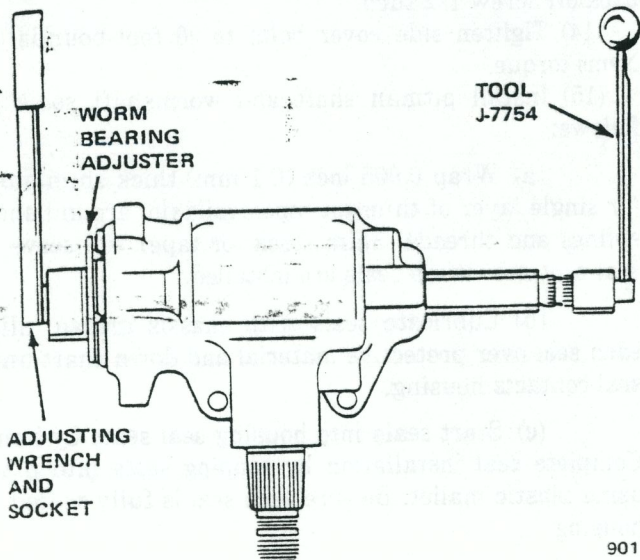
K-16 Adjusting Worm Bearing Preload Torque
